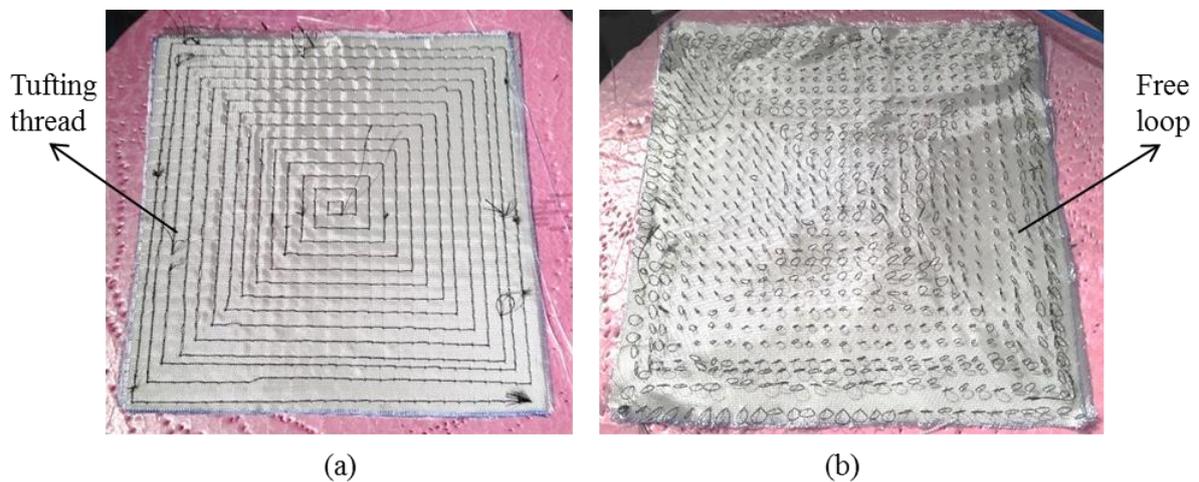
Top view (a) and bottom view (b) of tufted sample with a tufting spacing of 10mm.
